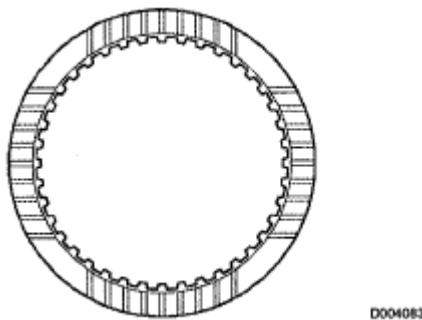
Checking Sliding Surface Of Disc, Plate And Flange
